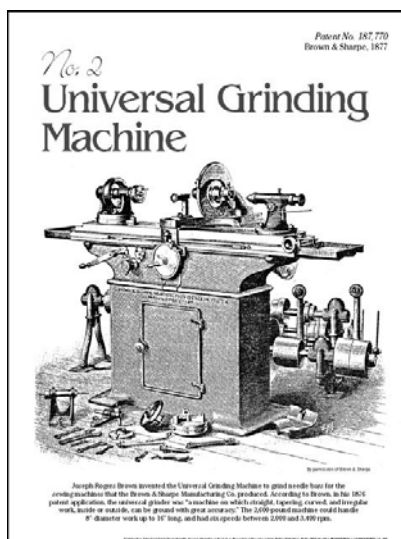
Brown & Sharpe, universal grinding machine, 1877.
